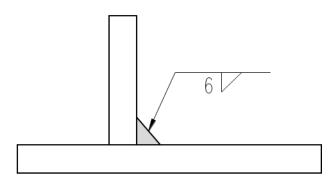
Determining Size of a Fillet Weld shows how the size of a fillet weld is determined. Accurate measurement of fillet welds requires the use of a weld fillet gauge.
